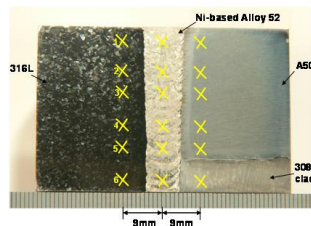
Polished and etched cross-section of mock-up (MC1) DMW weld showing different materials, Alloy 52 weld beads and neutron diffraction measurement locations
